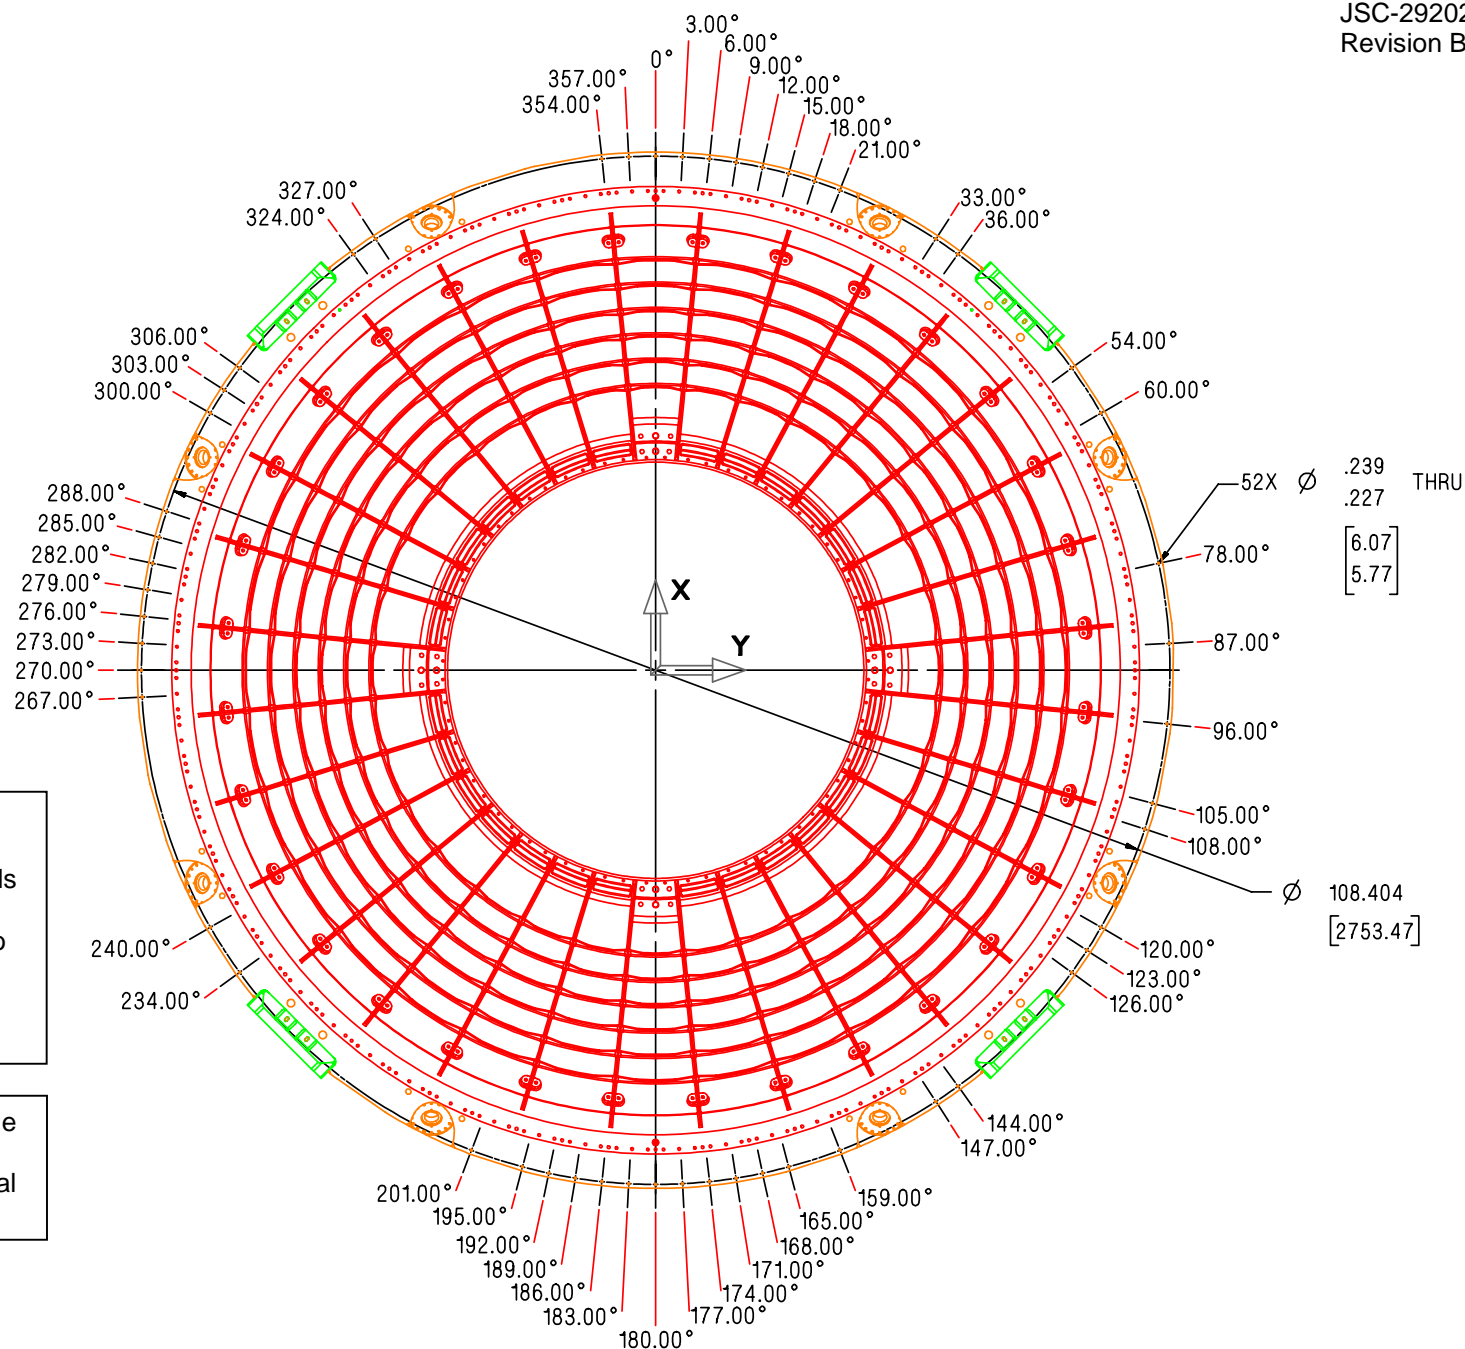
Generic Bolt Hole Pattern on VC Outer Cylinder Lower Flange
